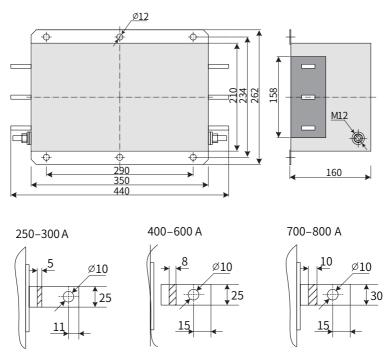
Dimensions of Jianli series 250-800 A filter (unit: mm)
